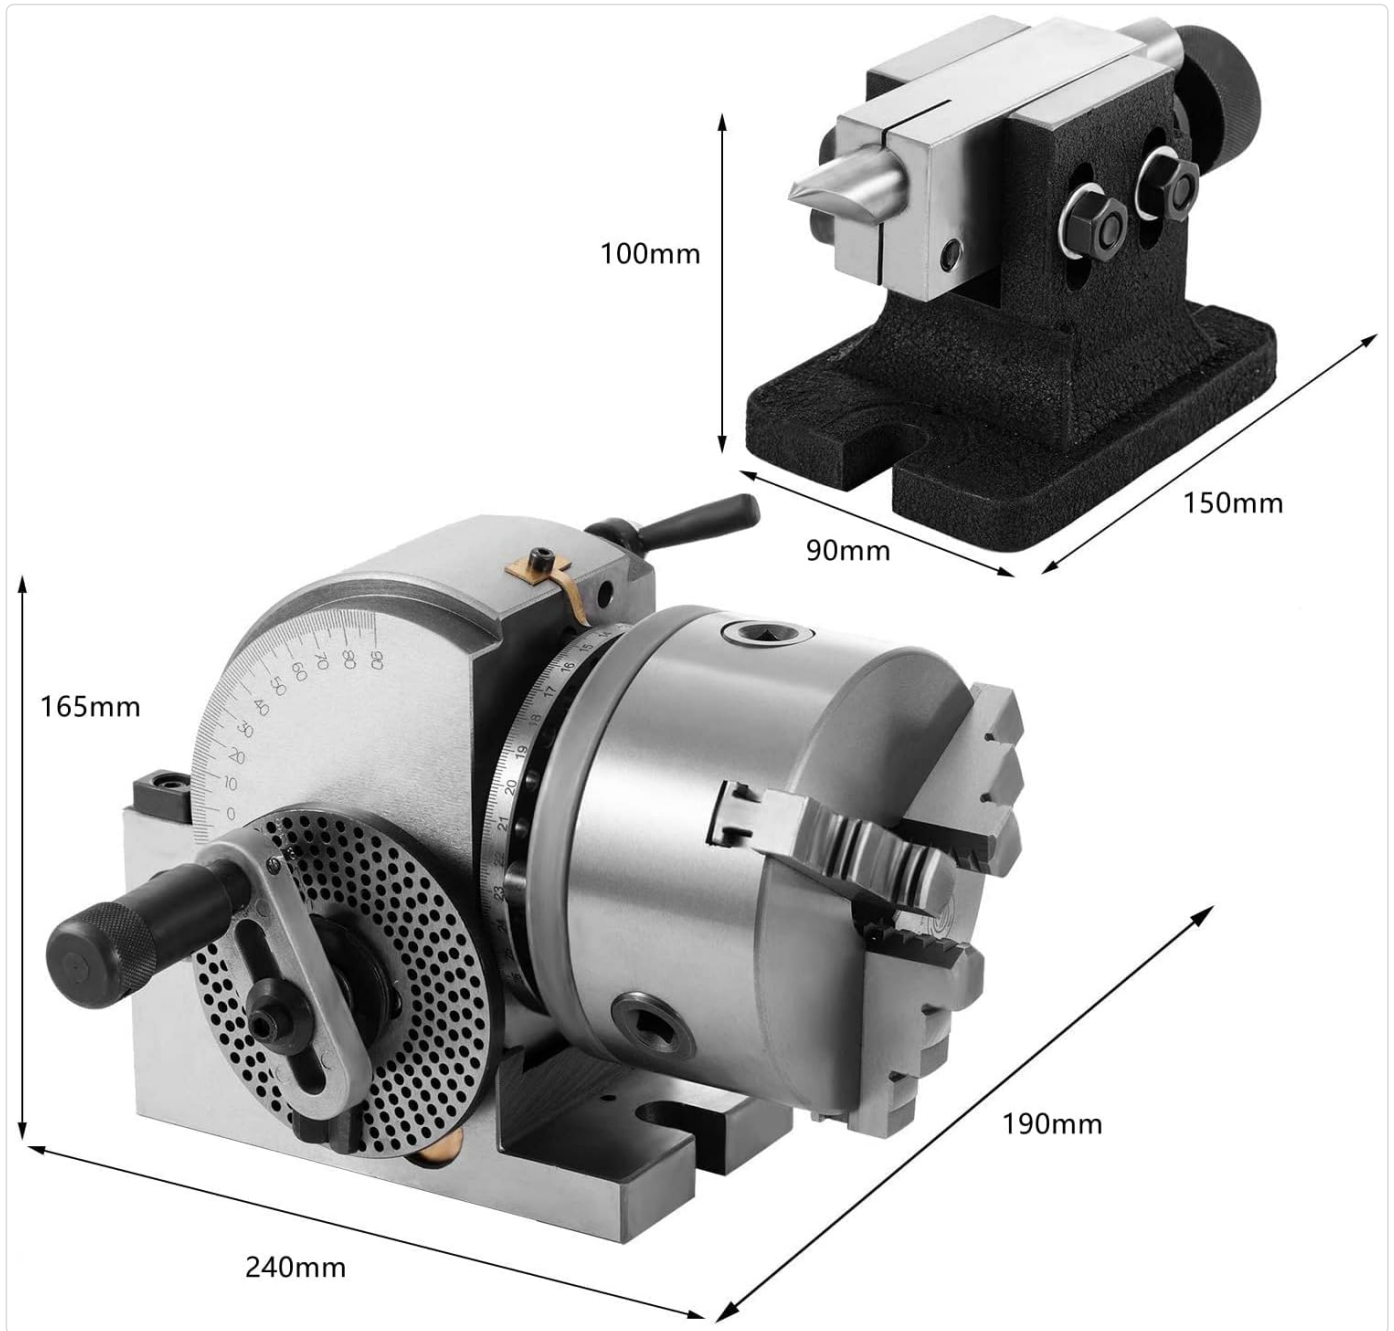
Key dimensions of the dividing head and tailstock, illustrating the overall size and center height.
